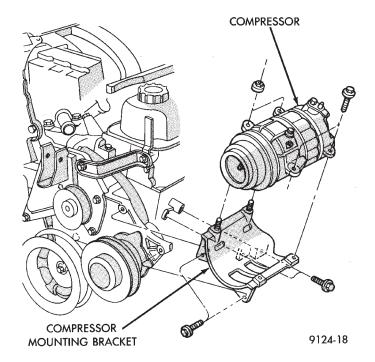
A/C Compressor Removal and Installation—3.3L Engines
